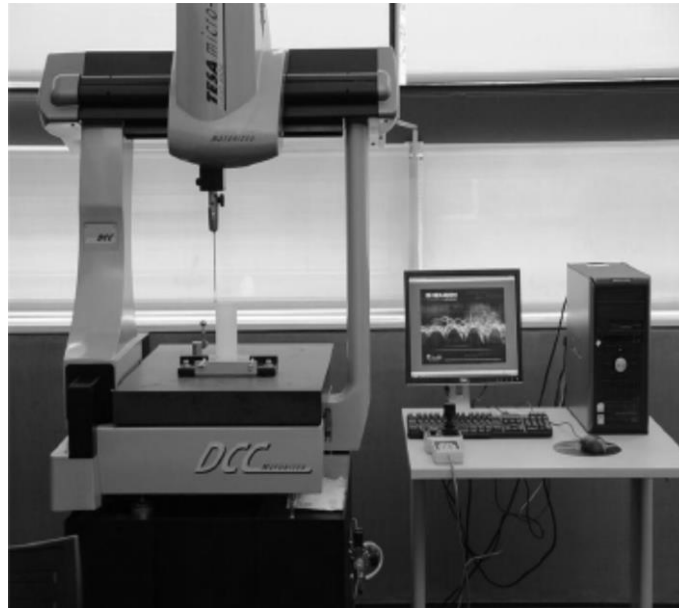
Tesa 3D CMM Equipment to measure the moulding dimensions
